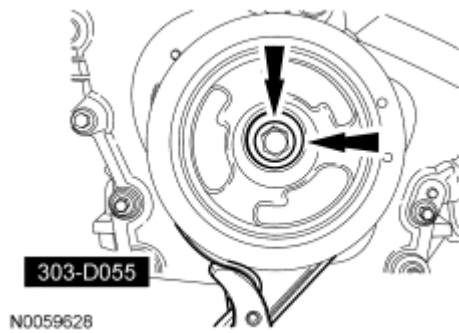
Removing Crankshaft Bolt & Washer Using Special Tool (303-D055)
